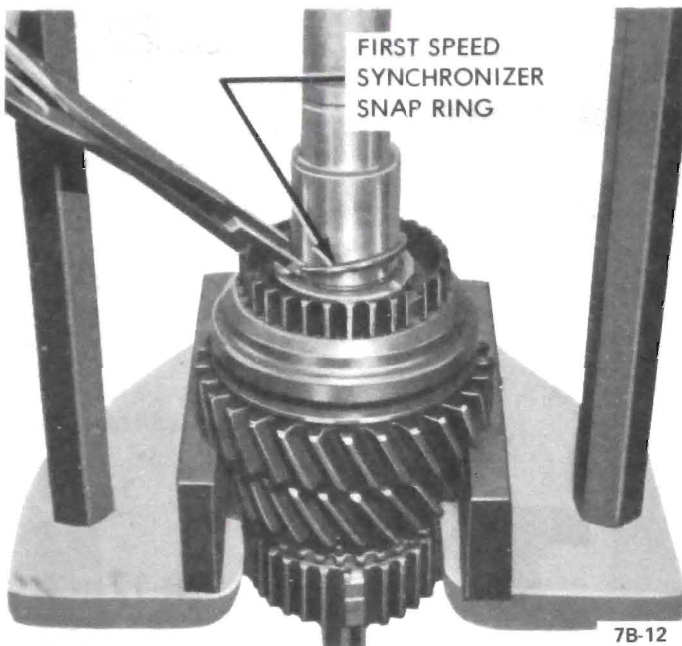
B-12 - Removing First Speed Synchronizer Snap Ring
